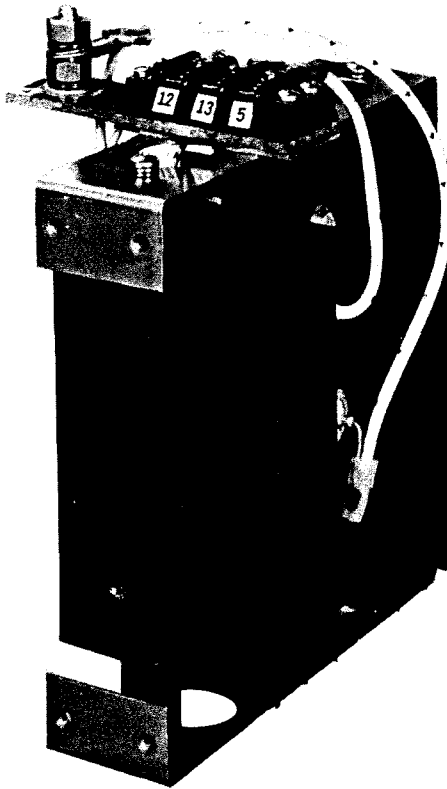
(SCR MODULE SUB-ASSEMBLY. 1143)
